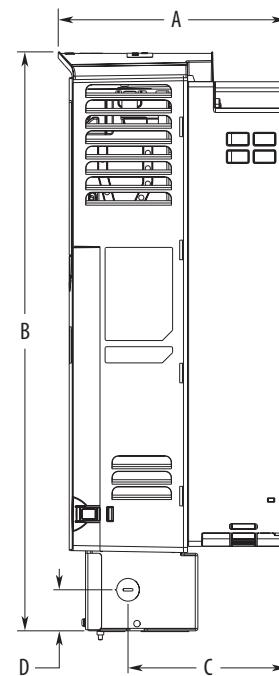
IP20, NEMA/UL Open Type Frames 1...5 (Frame 2 Shown)
